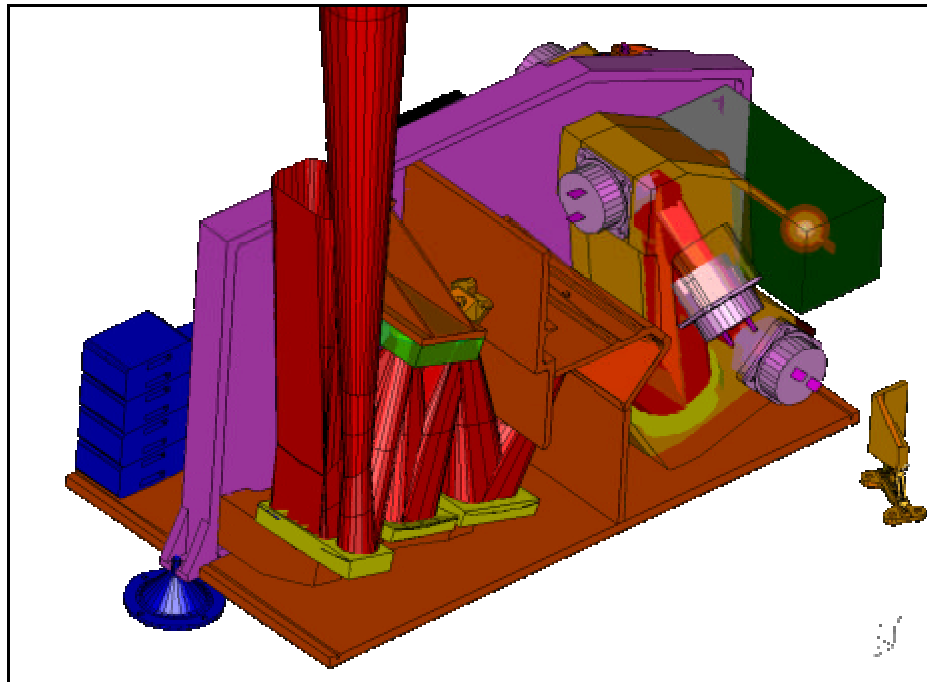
View of the inside of the instrument – photometer side, cover taken off
